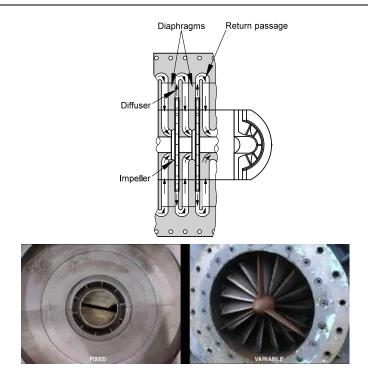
Top*: Cutaway showing inlet guide vanes located ahead of each impeller eye; *Bottom*: Left-fixed and right-variable guide vanes.
